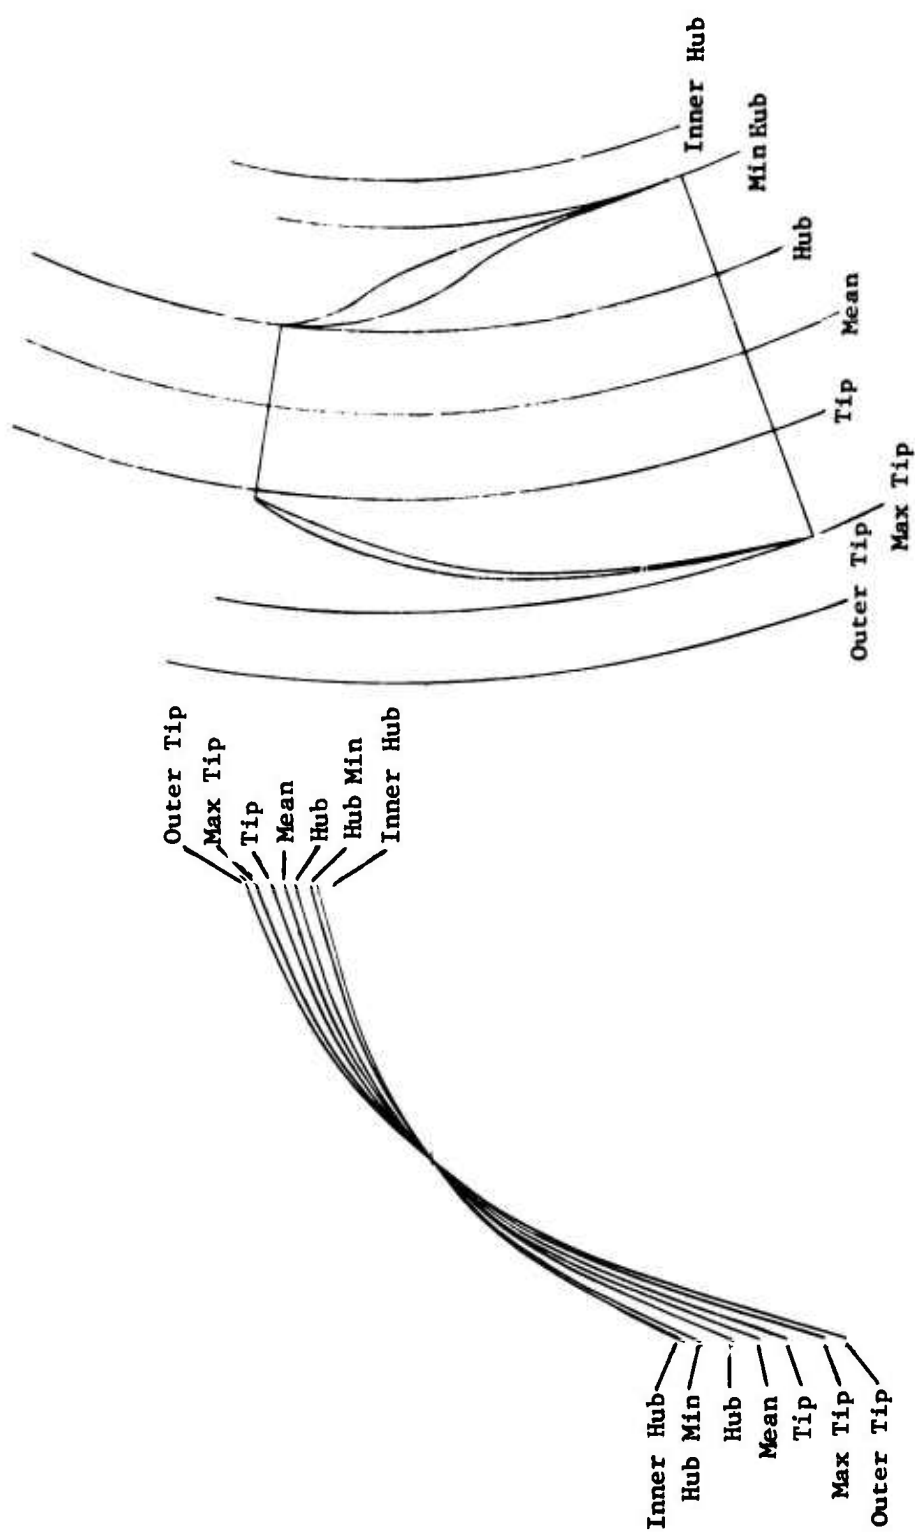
(U) Radial Element Camber Lines 2.8:1 Supersonic Compressor Rotor.
